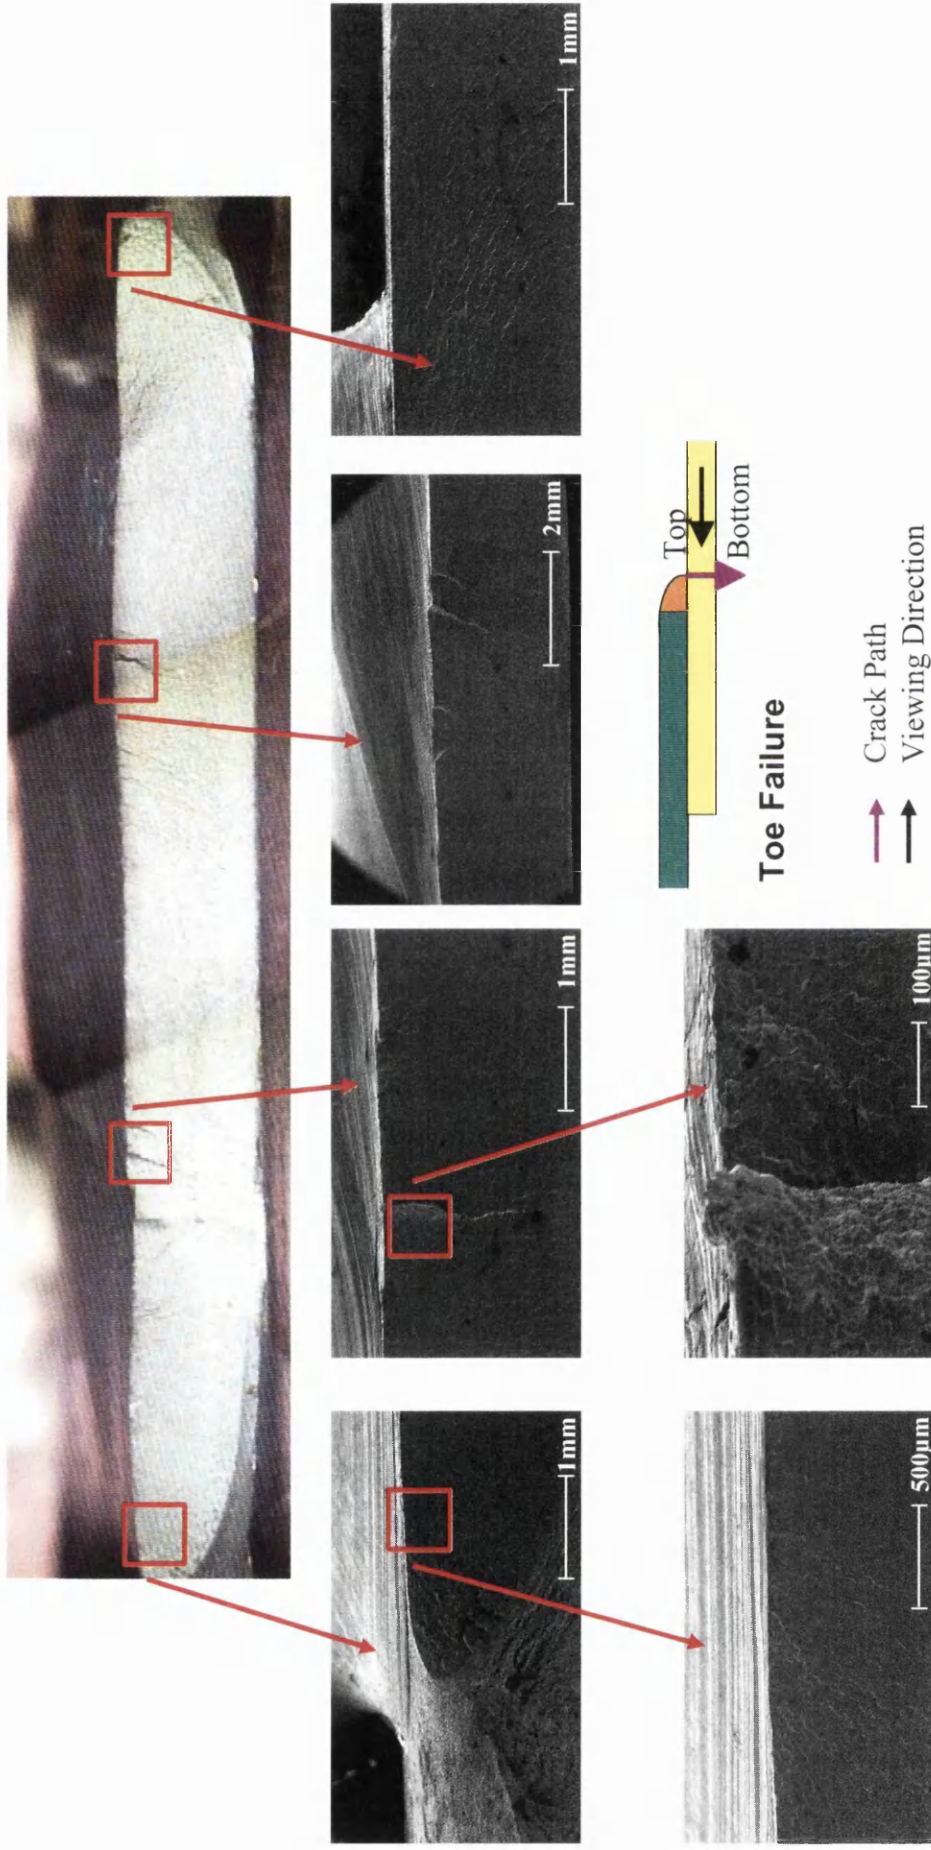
Typical Fracture Surface for Variable Amplitude Block Loading GM11A Weld Toe Failure – Weld View
